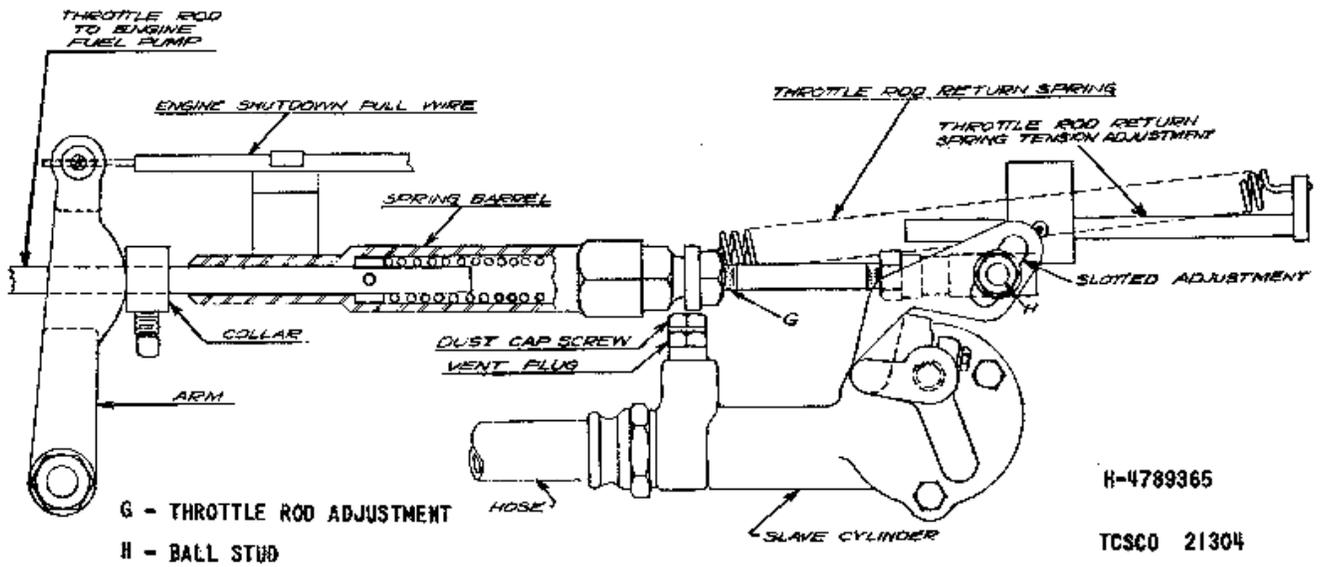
Slave cylinder and throttle rod arrangements used in hydraulic throttle control.
